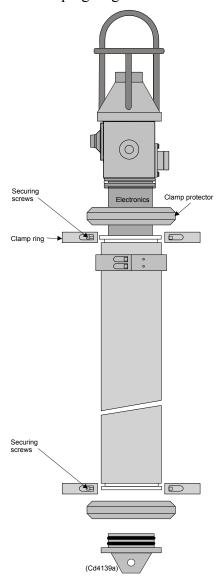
Example of a basic aluminium transponder pressure housing assembly
